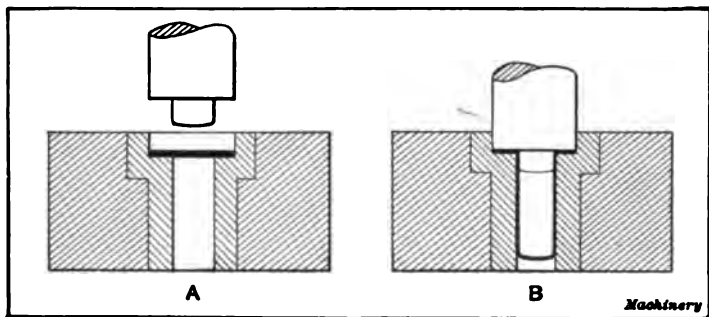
Lee's Method of Making Tubular Articles, Patented in 1906. A, the Die with Blank in Position; B, the Extruded Shell
